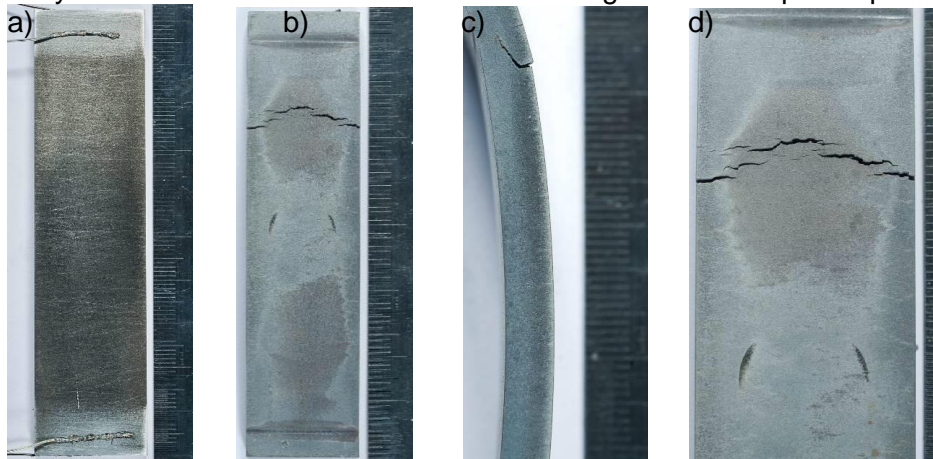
Uncoated Zircaloy-4 reference sample before and after the fatigue test: a) As-cleaned and welded sample before testing; b) Bottom surface under tension after the test; c) Side view with the detail of the crack growth direction; d) Main crack on the bottom surface.
